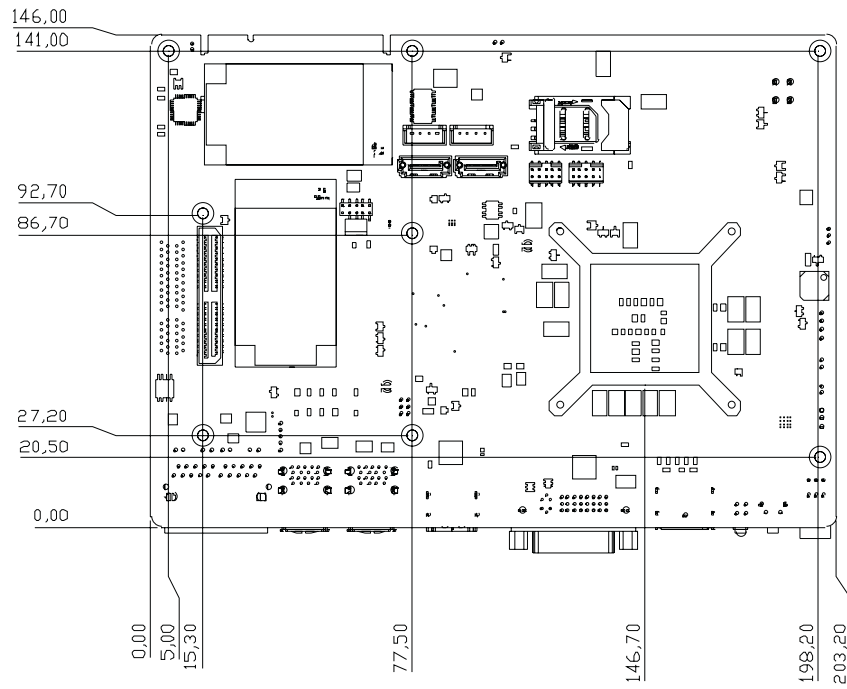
MIO-9290 Mechanical Drawing (Bottom Side)
